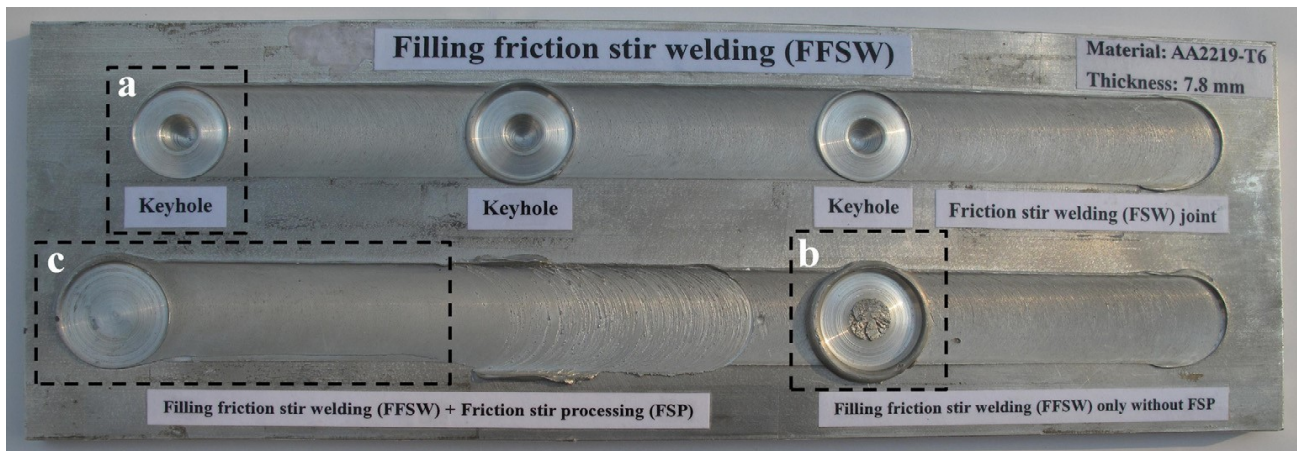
AA7075 bit for repairing AA2219 keyhole through FFSW process with (a) friction stir welding with keyhole defects, (b) filled keyhole, (c) repaired keyhole using friction stir processing [42].
